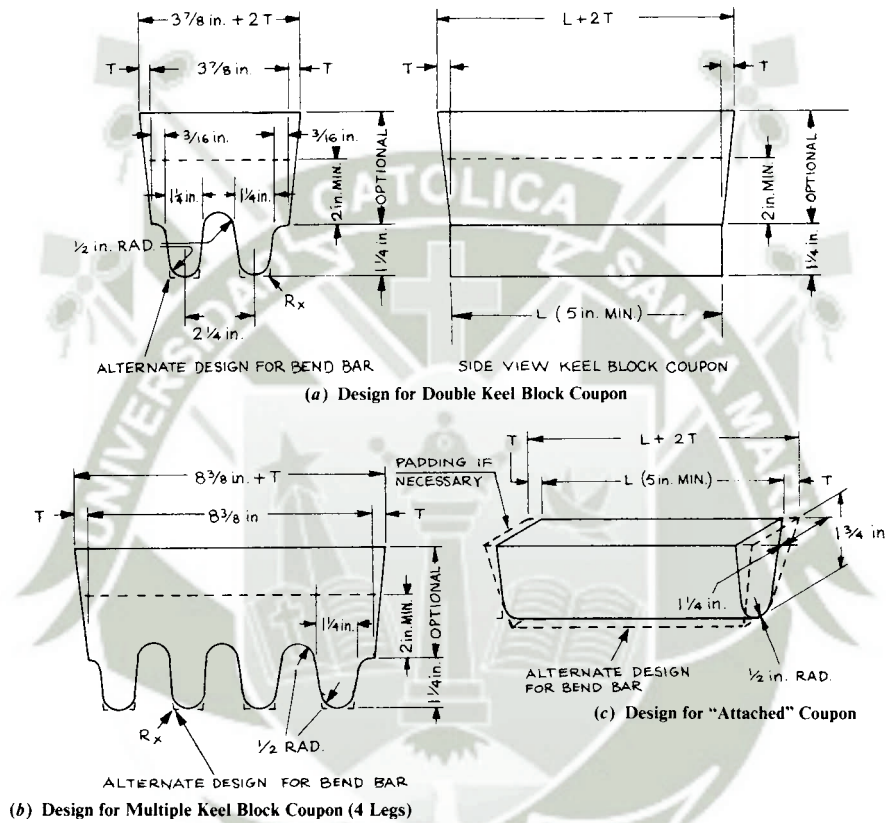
B Test Coupons for Castings (in.) (see Table 1 for Details of Design)
